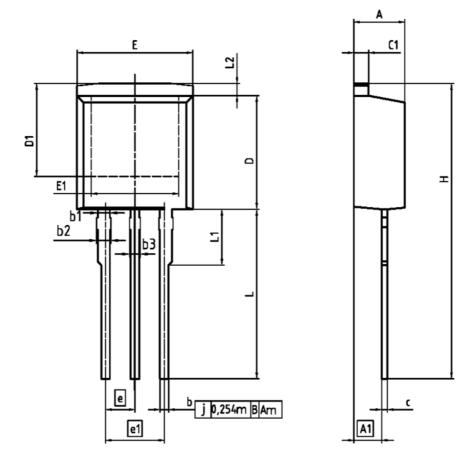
Outline PG-TO-220 FullPAK dimensions in mm
